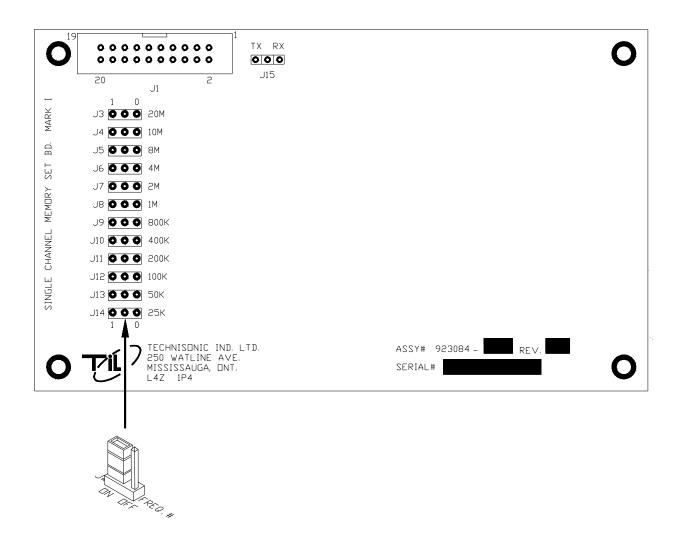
Single Channel Memory Set Module A5A1 - Component Layout
